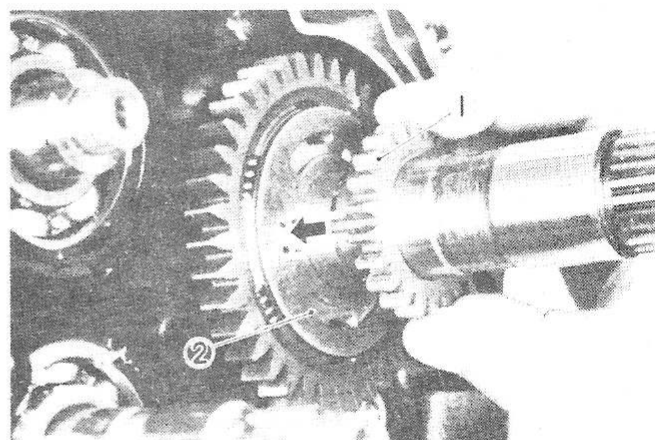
B.48 Make sure the tabs on the oil pump drive gear (1) fit into the slots in the washer (2) and gear (Sec 24)
